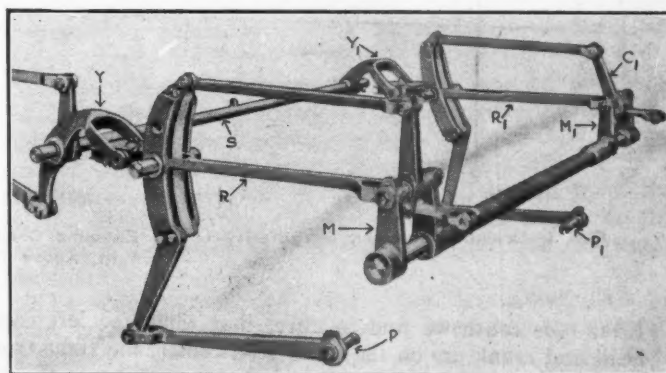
Young Locomotive Valve Gear with Link Blocks in Mid Position
